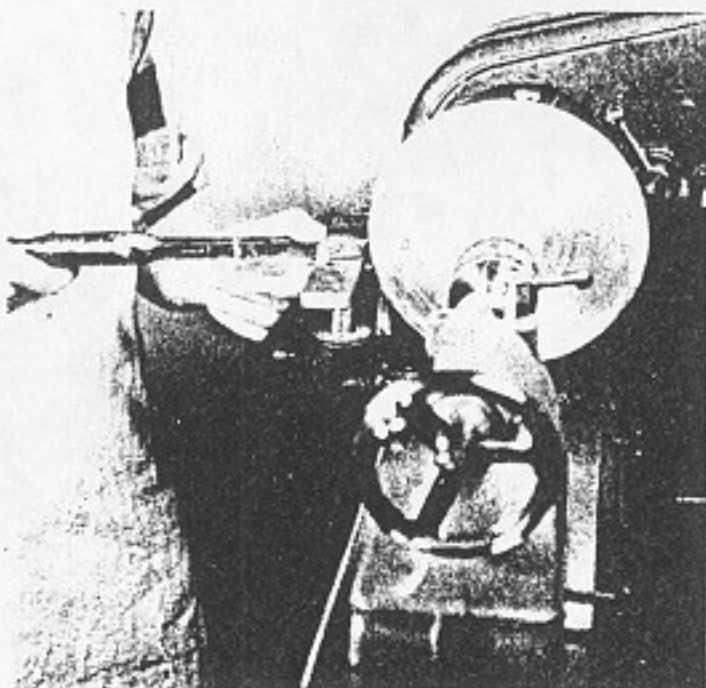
The edge of the disc is trimmed until it runs true.
